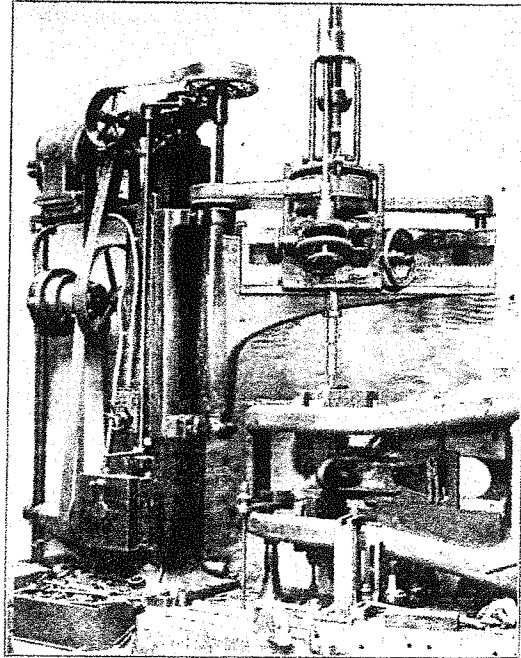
MOTOR-DRIVEN RADIAL DRILL.
